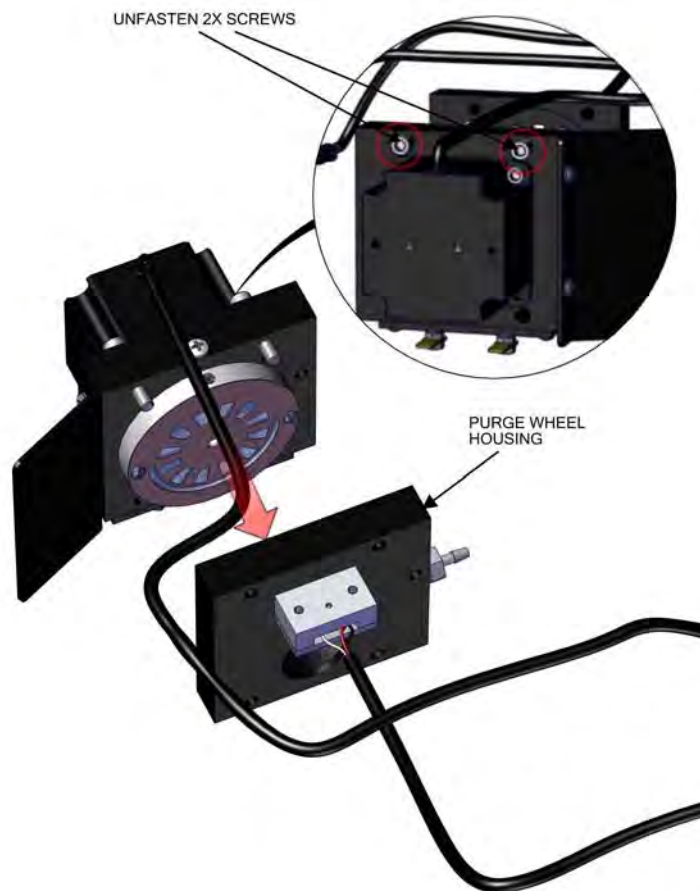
Purge Housing Removal from Motor Assembly (pt 4)
